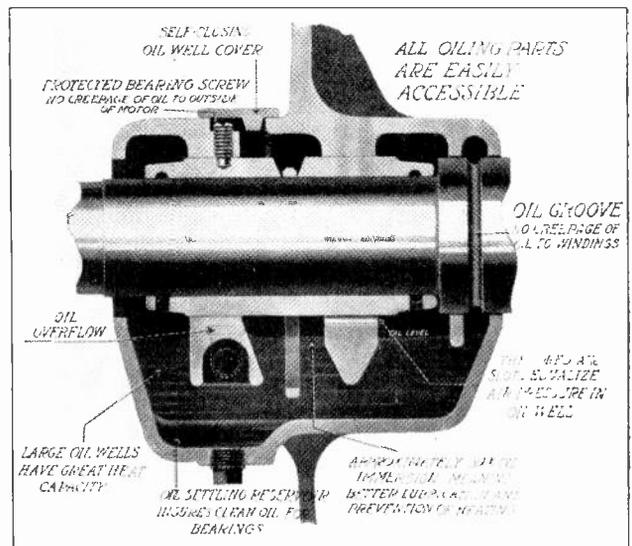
Another excellent sectional view of a sleeve type bearing, showing oil level, oil ring, oil well cover, drain plug, bearing set screw, etc.
